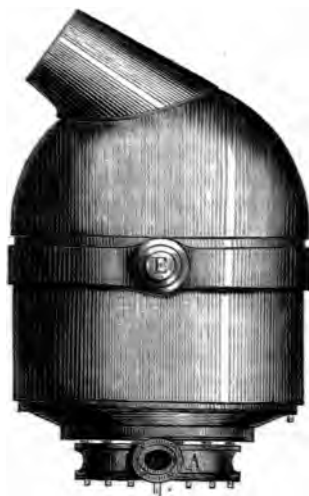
SIDE ELEVATION OF THE BESSEMER VESSEL OR CONVERTER.
